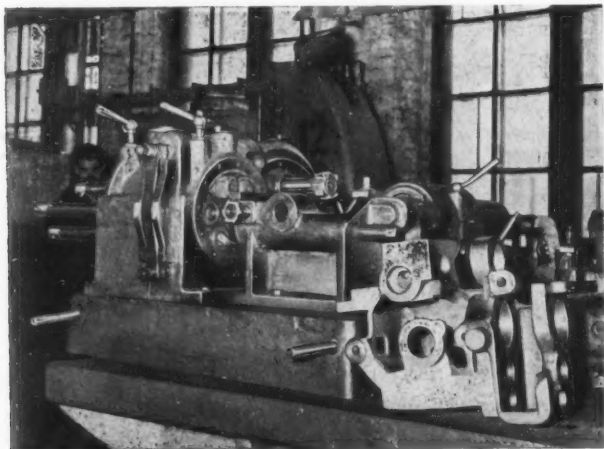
Hand-feed Gearboxes, One of which is Seen at the Right, are Bored with the Aid of the Large Fixture Shown. The Fixture Incorporates 13 Spindles and Cutting Tools, and is Used on the Small Boring Machine in the Background
